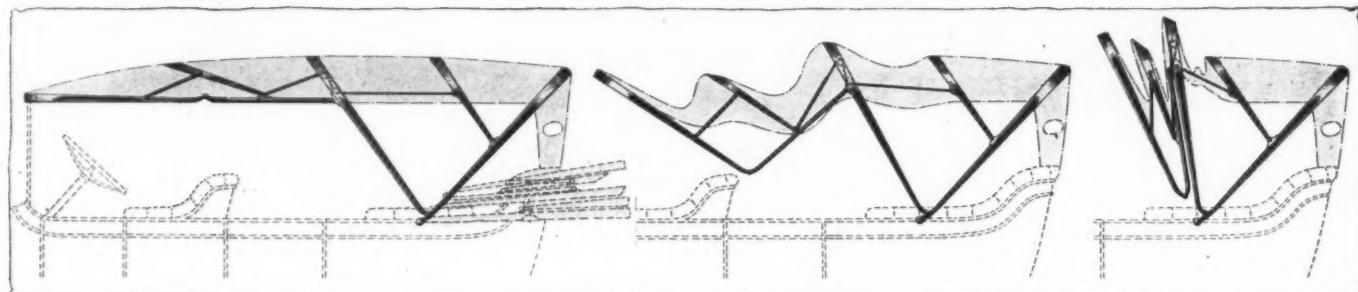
Sharrer one-hand top, showing the method of putting the top up. The top is held in position, when up, by two cables. Straps fasten the front firmly to the dash or cowl
